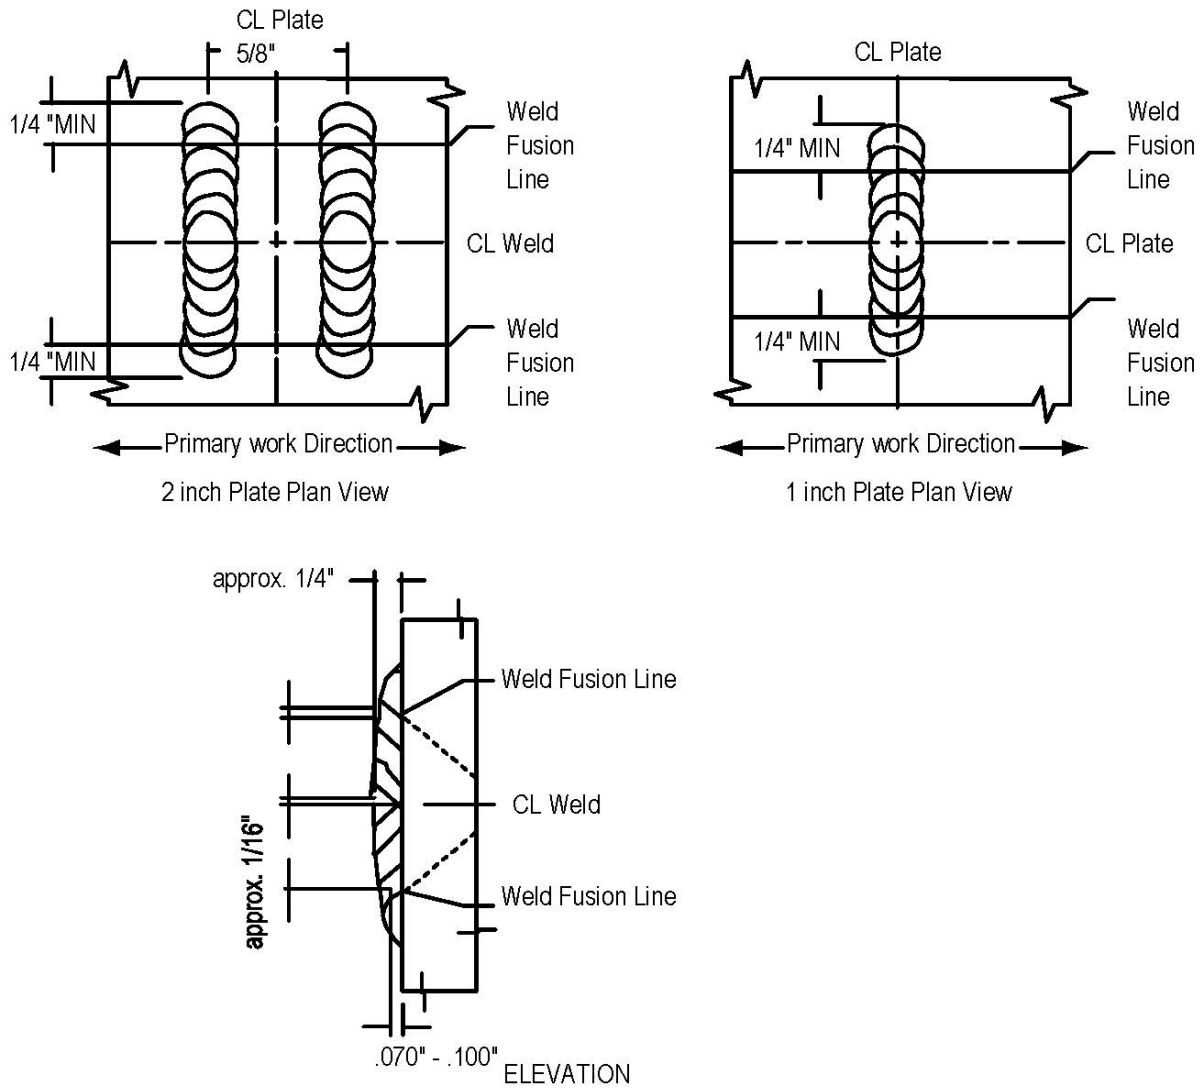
Crack Starter Bead Configuration – Weld Metal and Weld Procedure Evaluation.
